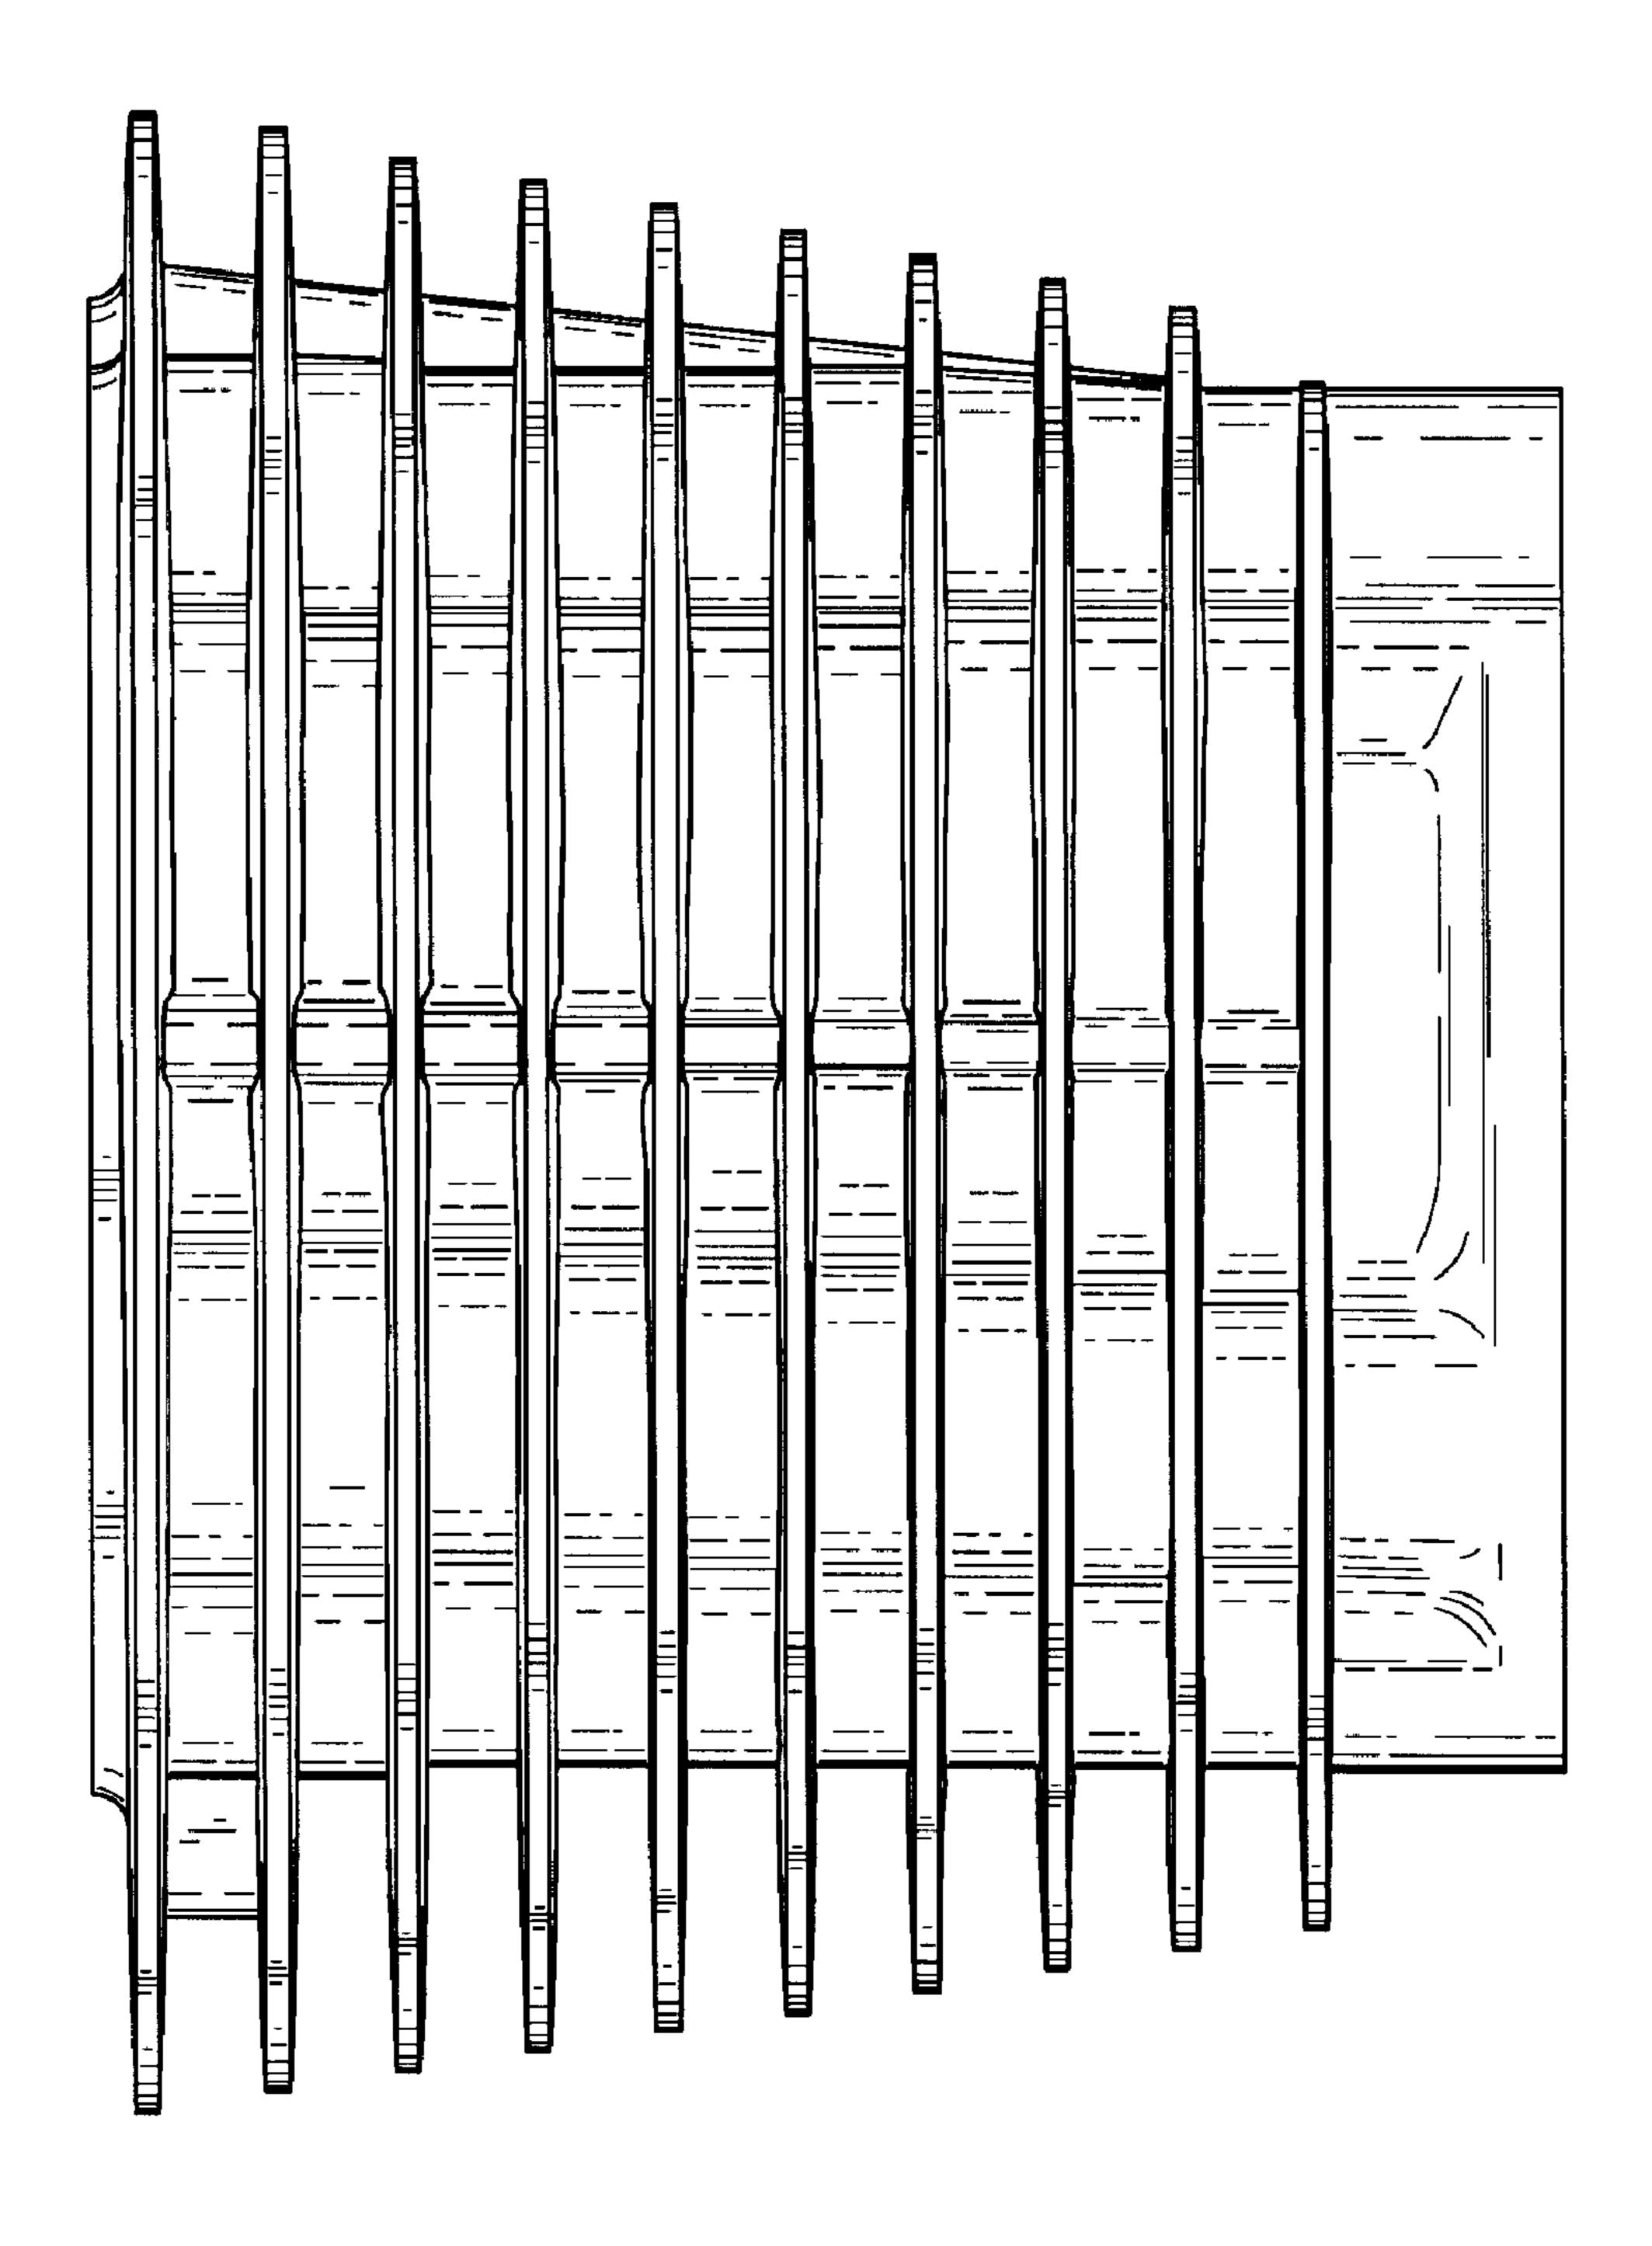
is a top view of the engine cylinder of FIG. 1.
